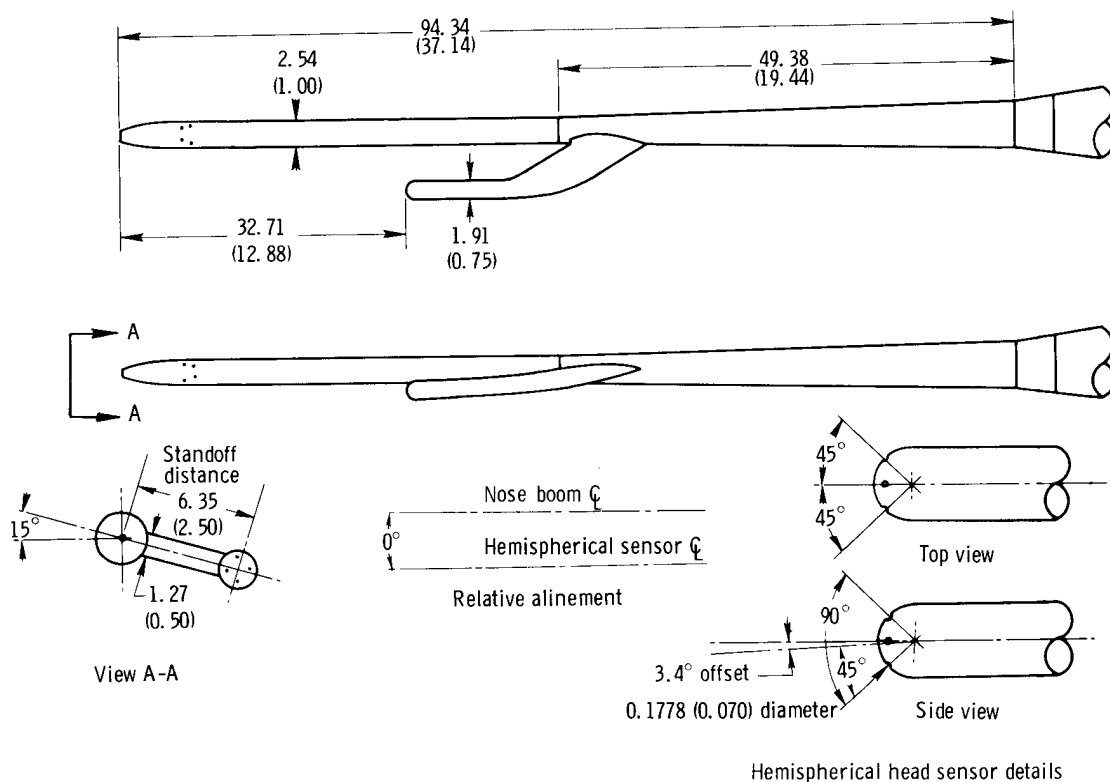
Three-view drawing of nose boom and pitot-static probe showing hemispherical head flow direction sensor. Dimensions in centimeters (inches).
